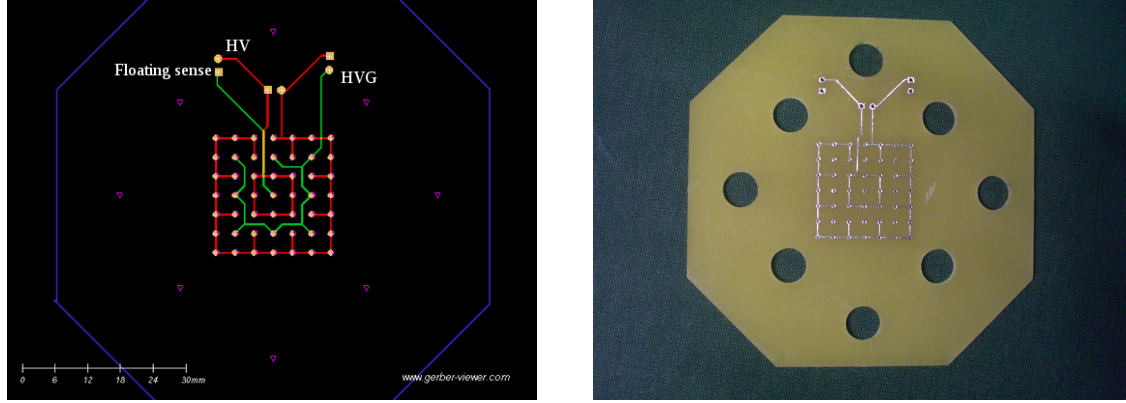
PCB schematics and picture for single-cell prototypes.
